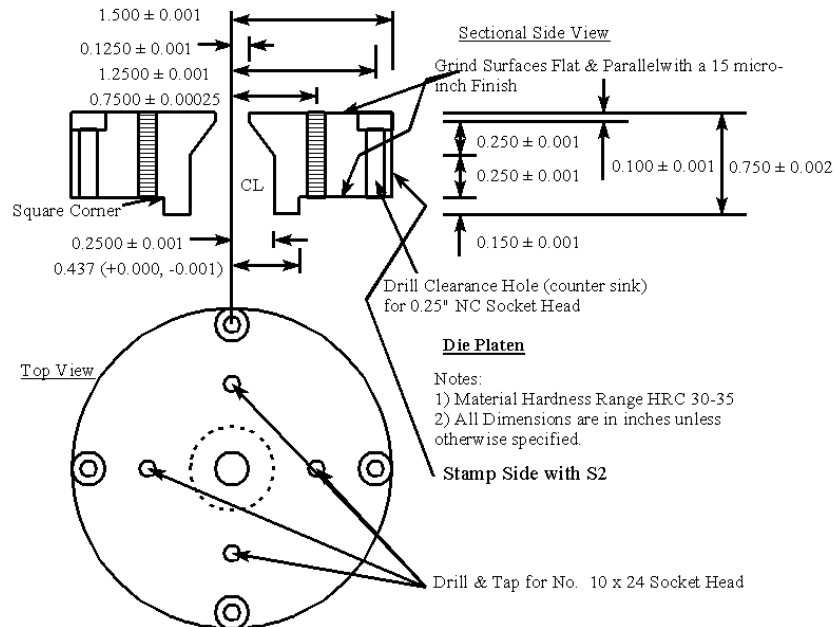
Schematic showing the general dimensional design requirements of the die platen fabricated for the shear punch test fixture.
